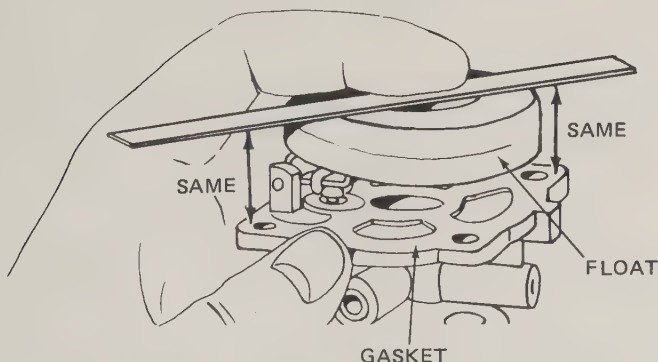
Checking the float level on one model carburetor. (Briggs & Stratton Corporation)
